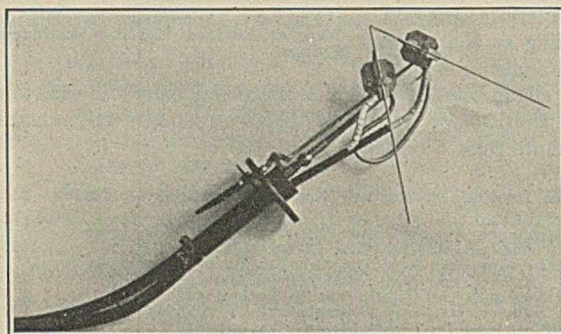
One Form of Atomic Hydrogen Welding Torch
